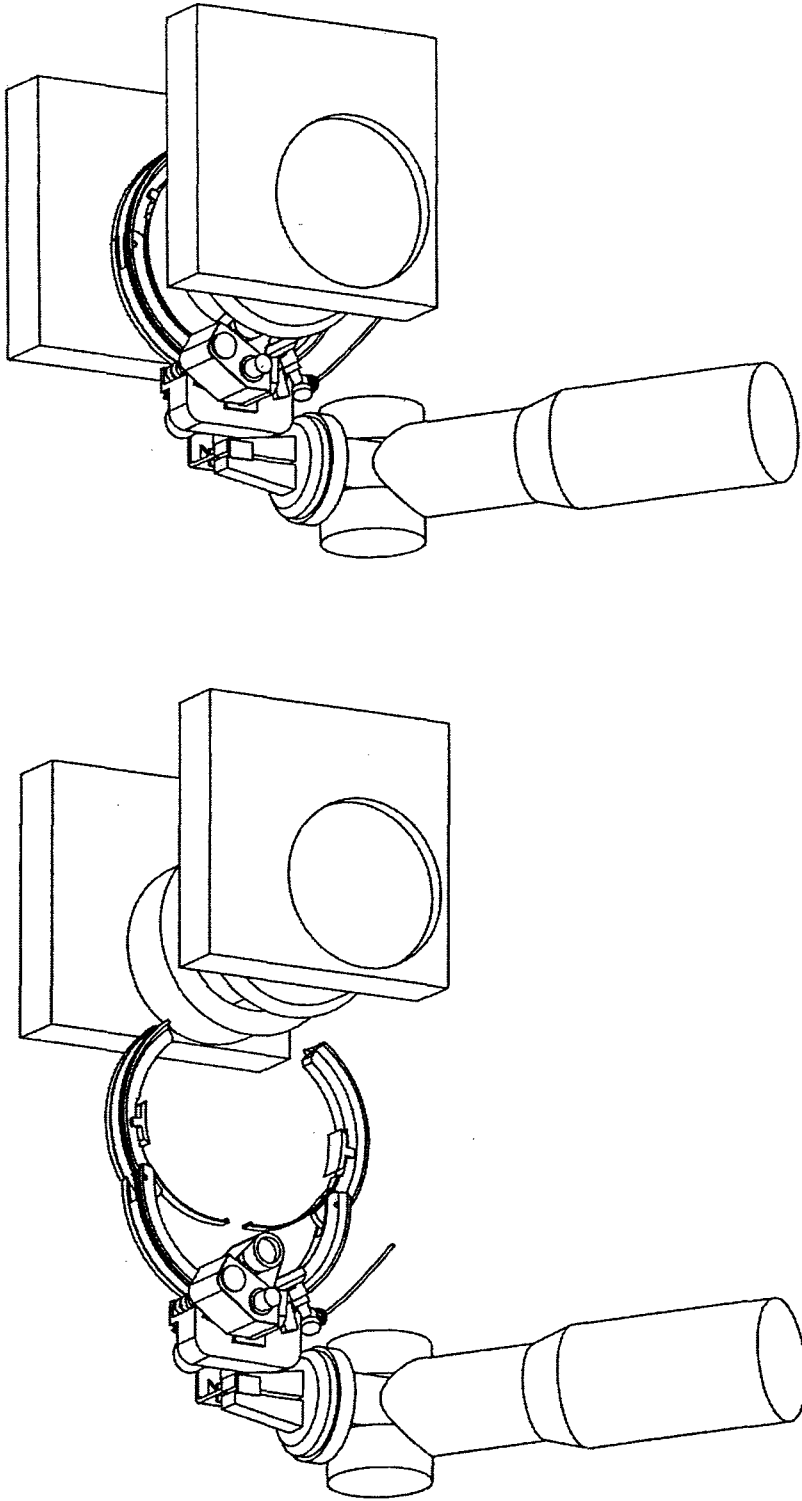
Cesium Cleaning Tool Transfer by Manipulator to Insulators
